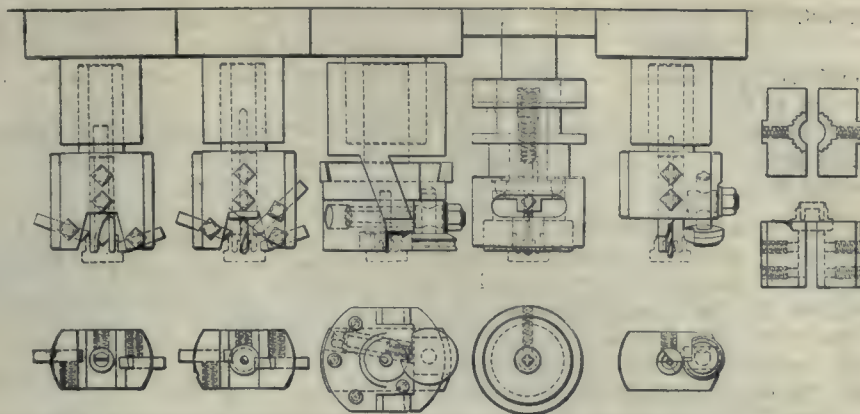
TOOL LAYOUT FOR MACHINING TIME FUSE PLUG.
